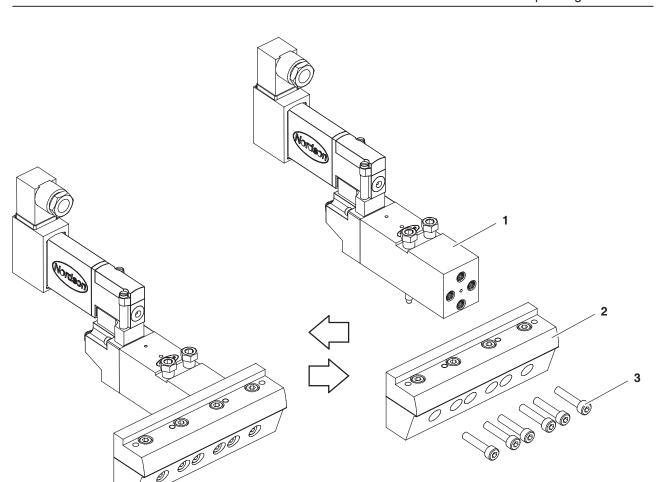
Removing or installing a coating nozzle (typical nozzle shown)
